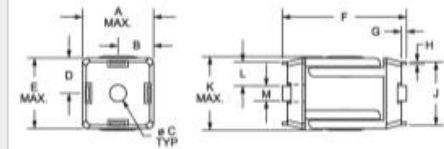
Pivot joint specifications (taken from 80/20) used to facilitate angled impacts
